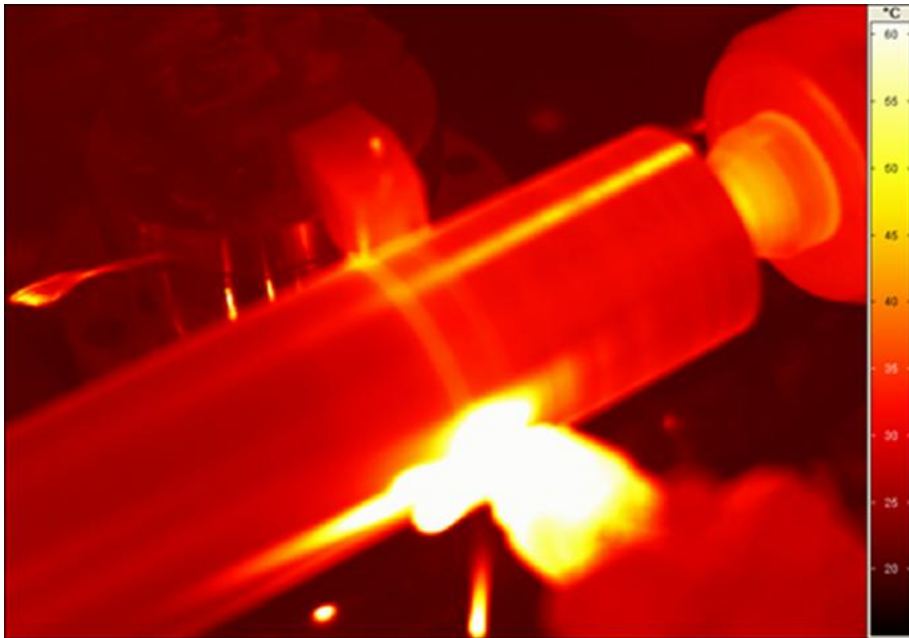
Thermogram of mild steel workpiece during cutting (75 m/min cutting speed, 0.08 mm/rev feed, 0.5 mm depth of cut and 10 mm distance between cutting tools)
